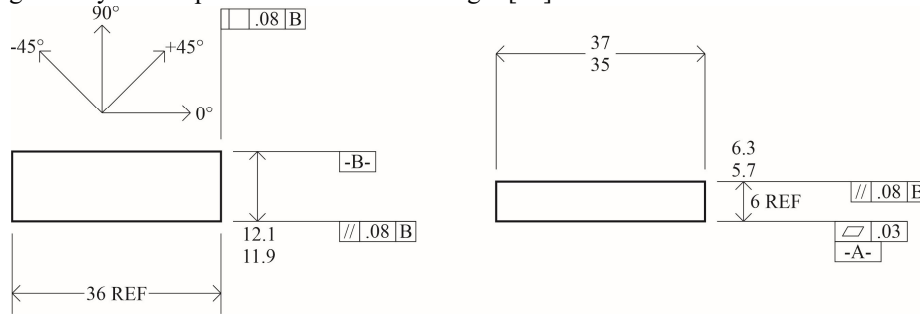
Standard geometry for specimen undergoing ILSS tests.
